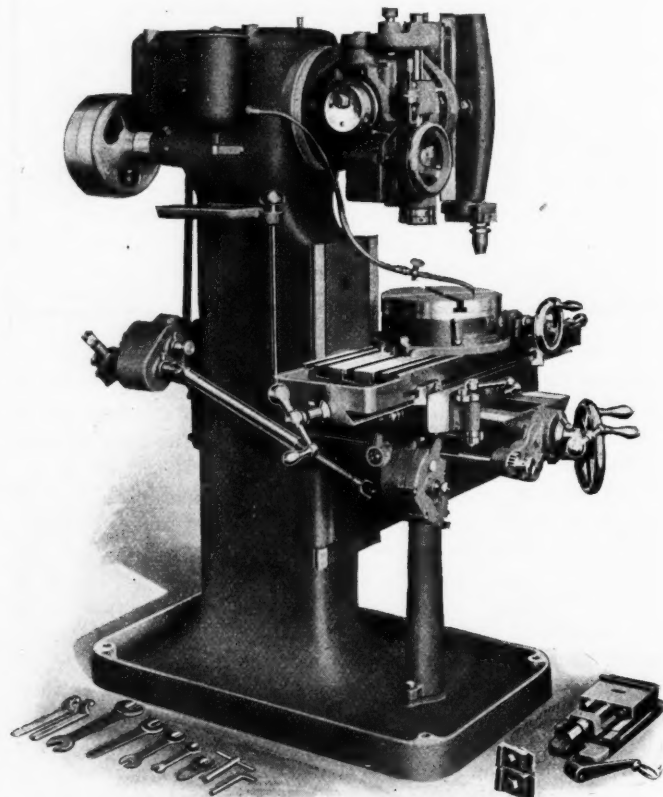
Universal Shaper equipped with Circular Table Attachment
